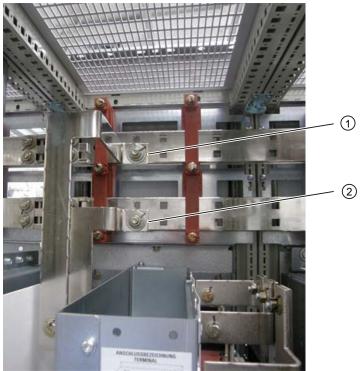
Connection to the DC busbar on the Basic Line Module, Smart Line Module, Active Line Module and Motor Module in the chassis format
